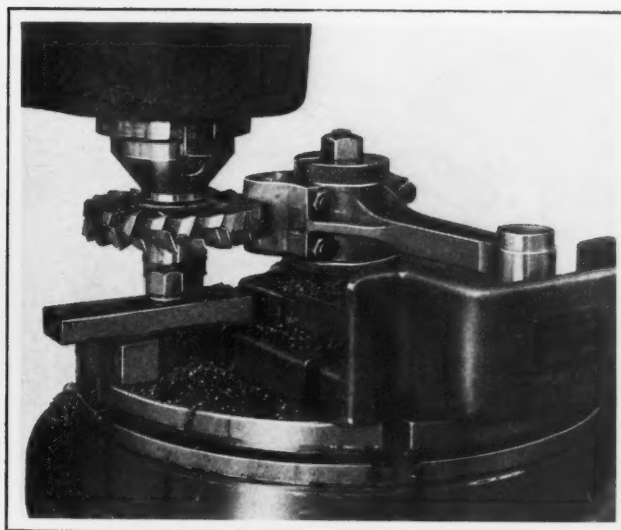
Typical Operation on a Vertical-spindle Milling Machine
